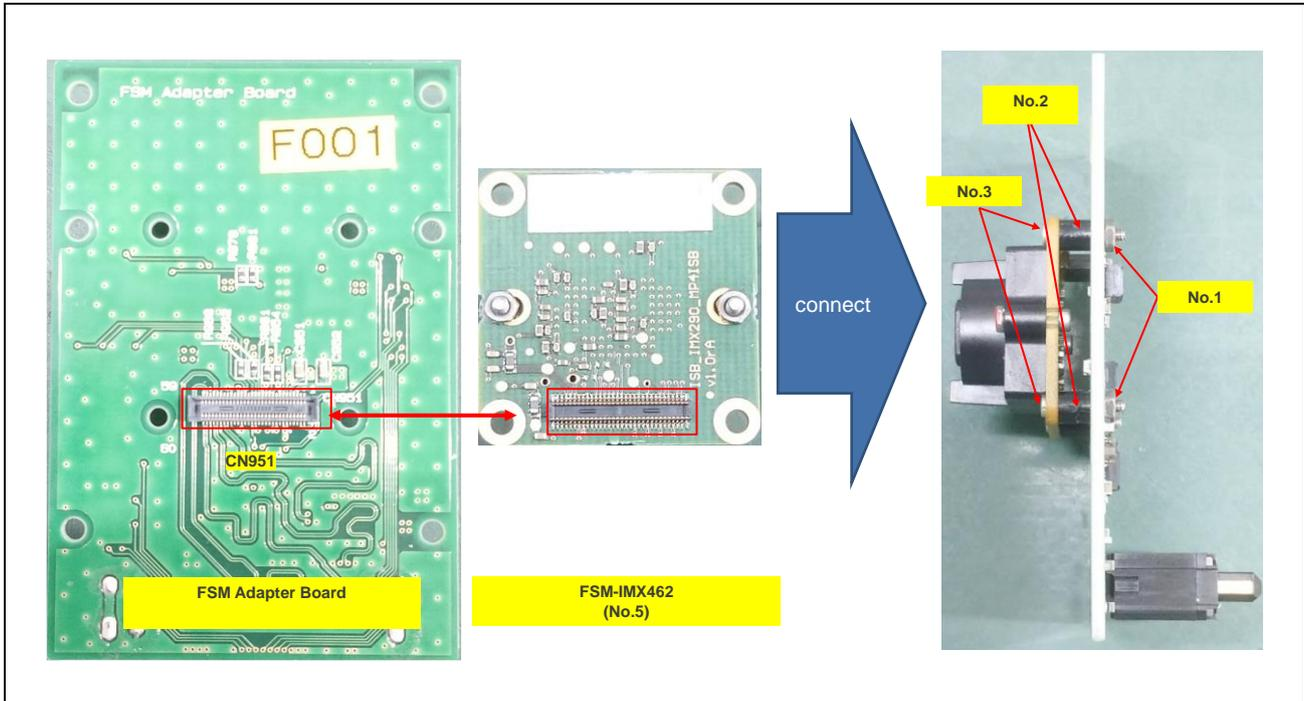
Connect FSM Adapter Board to FRAMOS Sensor Module (FSM-IMX462)
